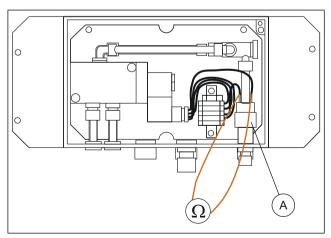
Adjusting the pressure switch: A - adjust with screwdriver, check with multimeter.
